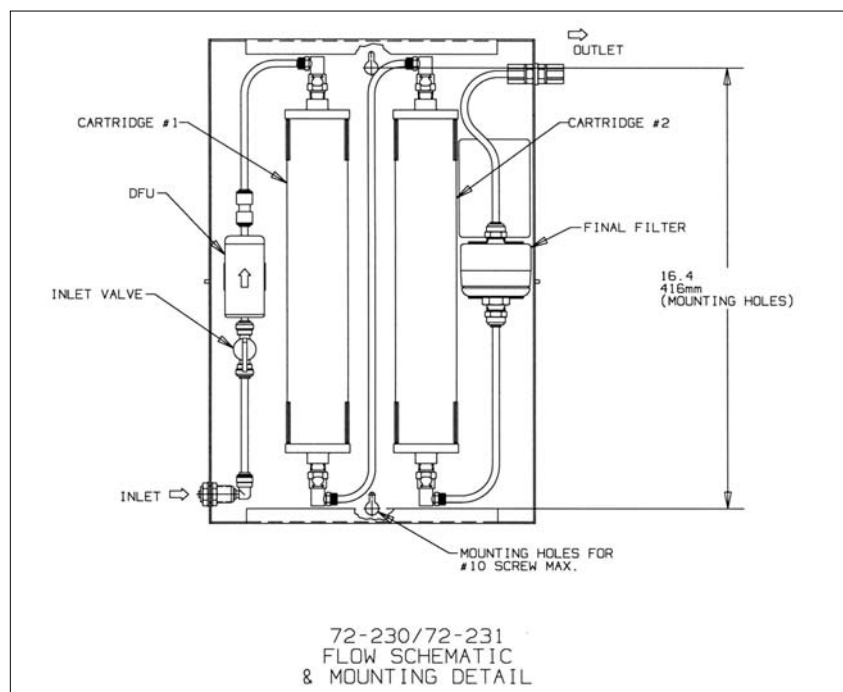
Mounting Dimensions and Flow Schematic for the 72-230/72-231
